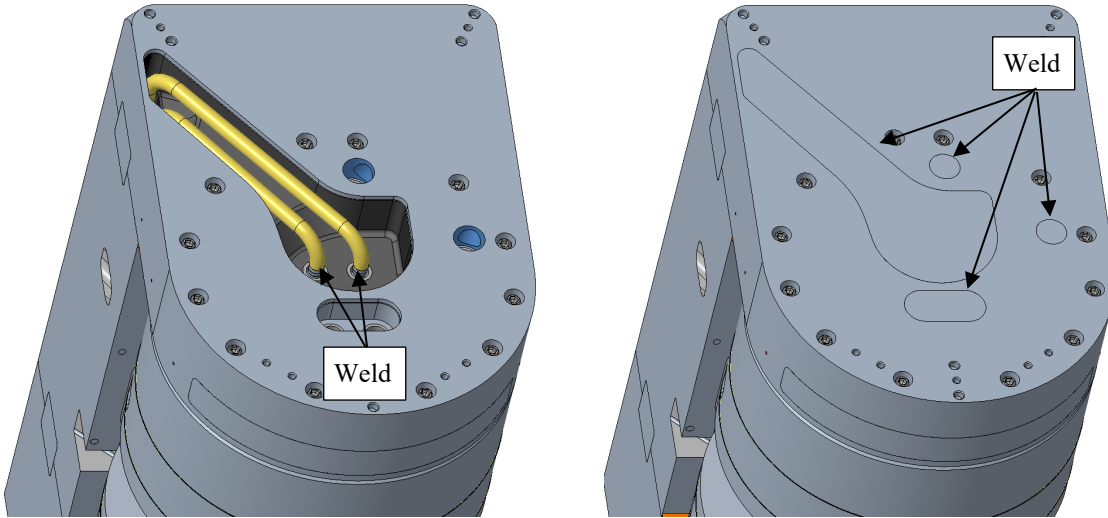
Lower hydrogen line welding (left) and lower cover plate welding (right).
